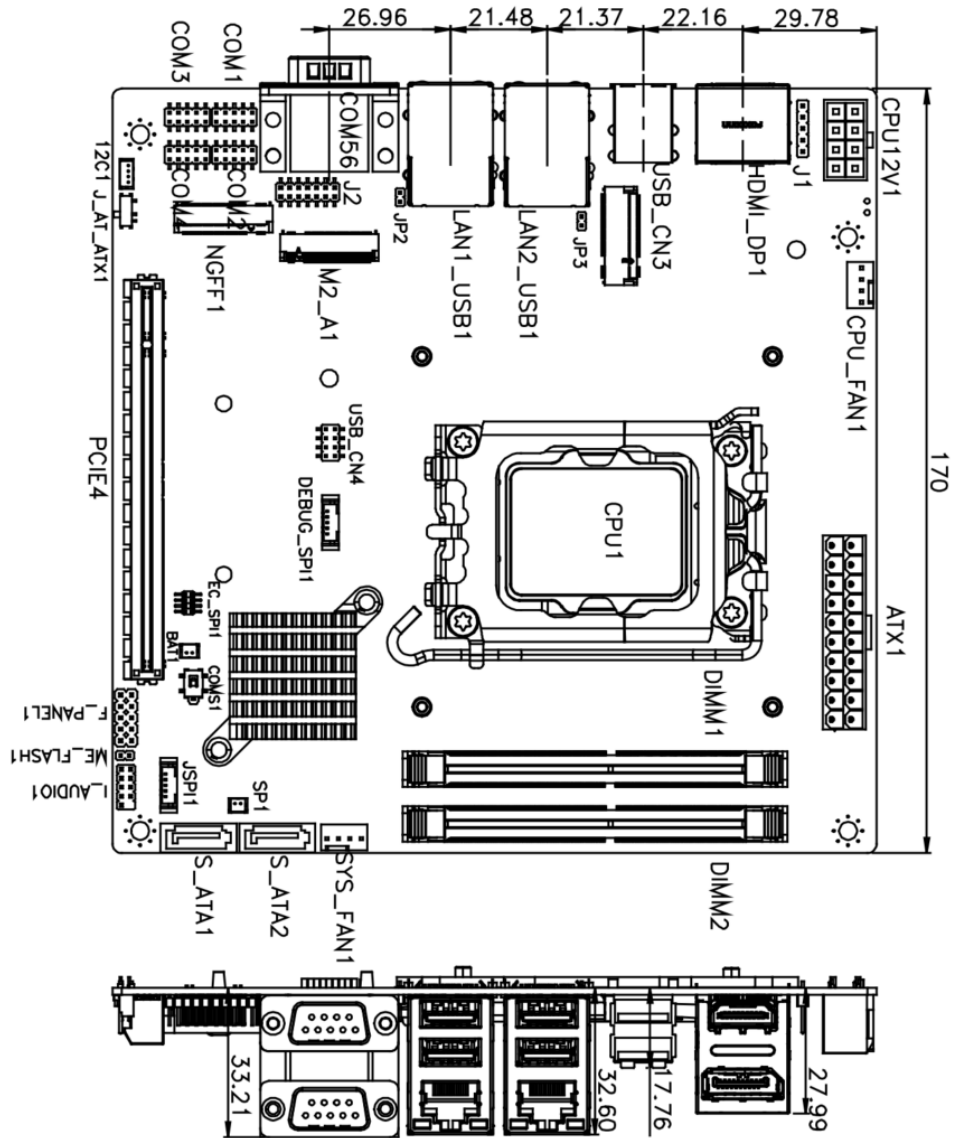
KINO-ADL-H610 Dimensions (mm)
